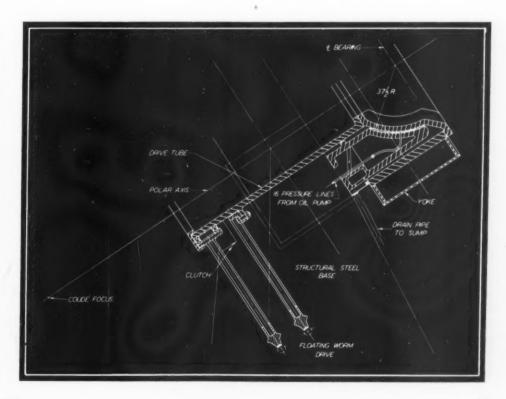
Oil inlet orifices are distributed so that the bearing is centralized under loadings bearings. The largest bearing is closest to the telescope tube and is 44-inches outside with 4-inch balls.
